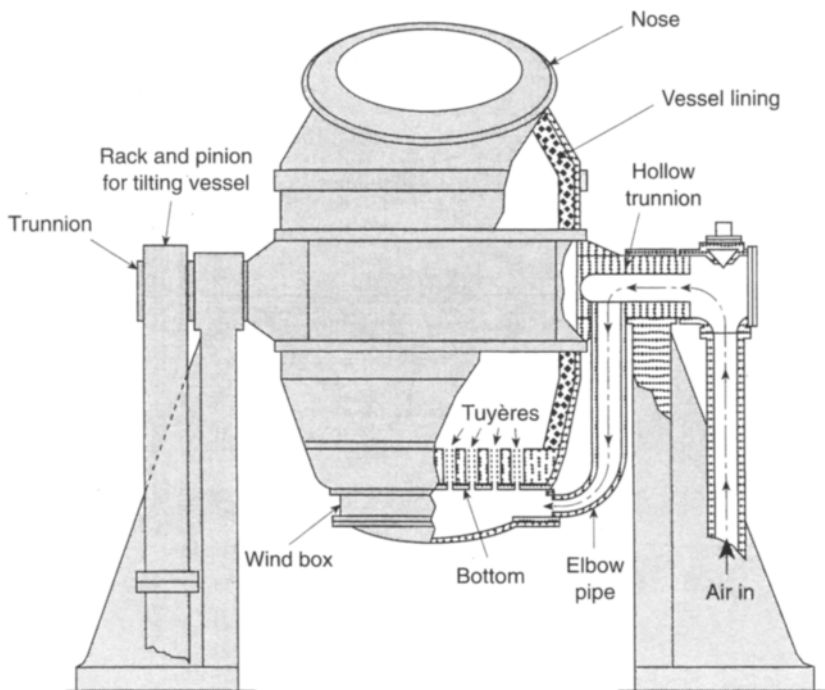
Schematic of a Bessemer steel converter. (Reproduced courtesy of The AISE Steel Foundation.)
